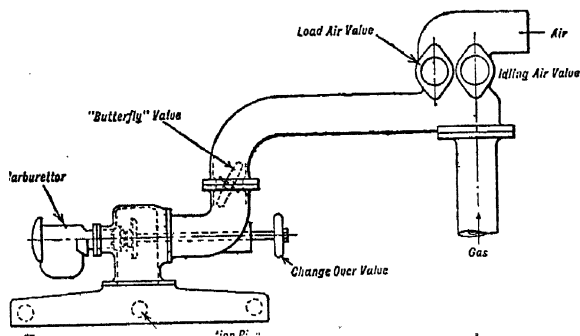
The Producer Gas Connections to the Engine Induction Manifold.
